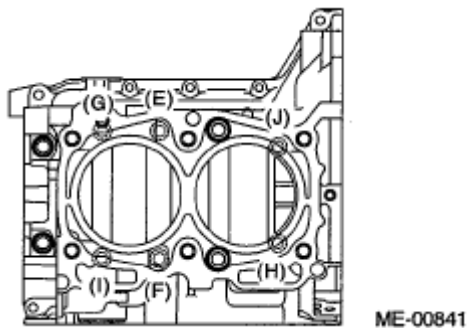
Identifying RH Side Cylinder Block Connecting Bolts Tightening Alphabetical Order
